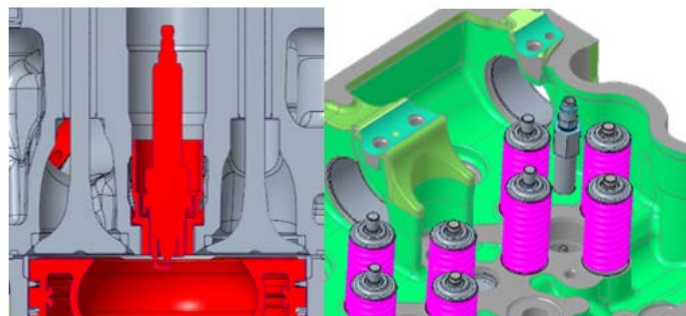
Left, spark plug with spark plug adapter in place of original diesel injector in cylinder #6. Right, pressure sensor installed in cylinder #6 using a machined adapter.
